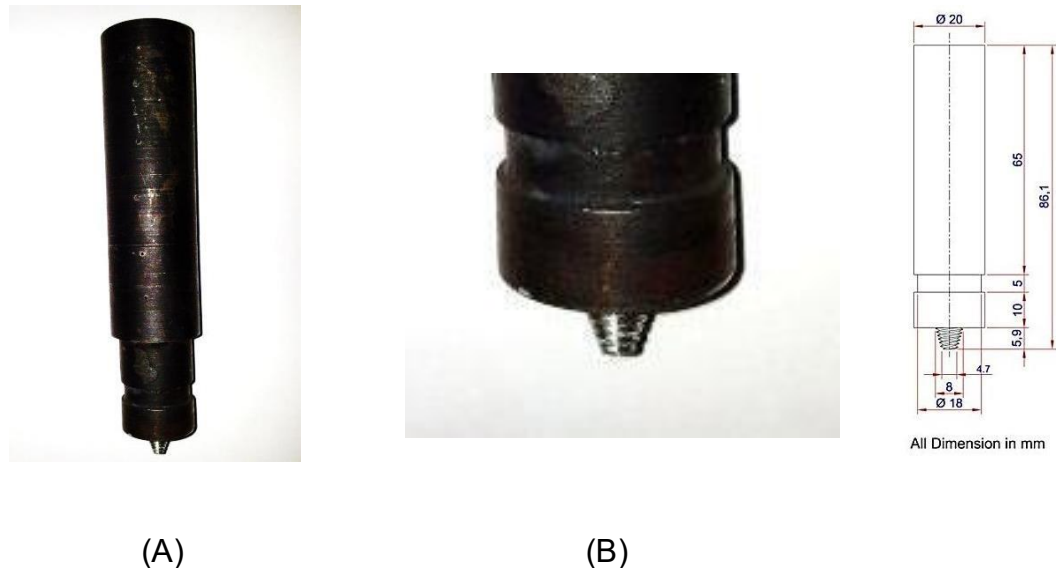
Friction Stir Welding with Toothed Conical Protrusion: (A) Photographic Image, (B) Dimensions in Millimeters.
